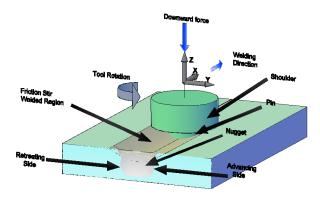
Friction Stir Welding (FSW) Process.
